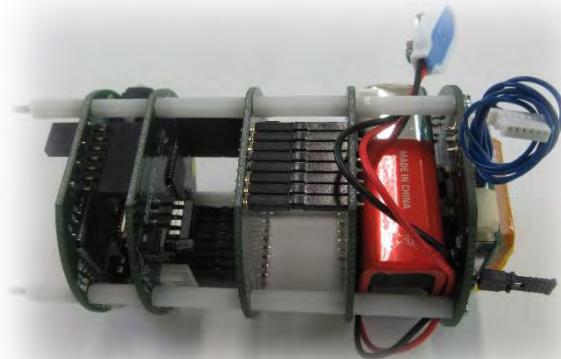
Assembly of the CAM board and 3×13 mm spacers to the OBC-USR-PWR-GPS subassembly: CAM-OBC-USR-PWR-GPS Subassembly.
